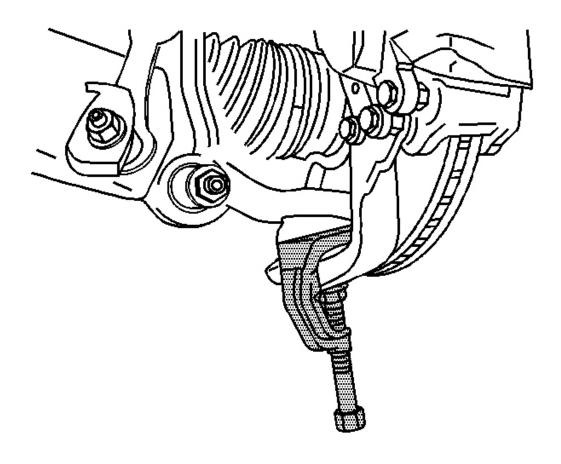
Removing Steering Knuckle From Lower Control Arm Courtesy of GENERAL MOTORS CORP.
